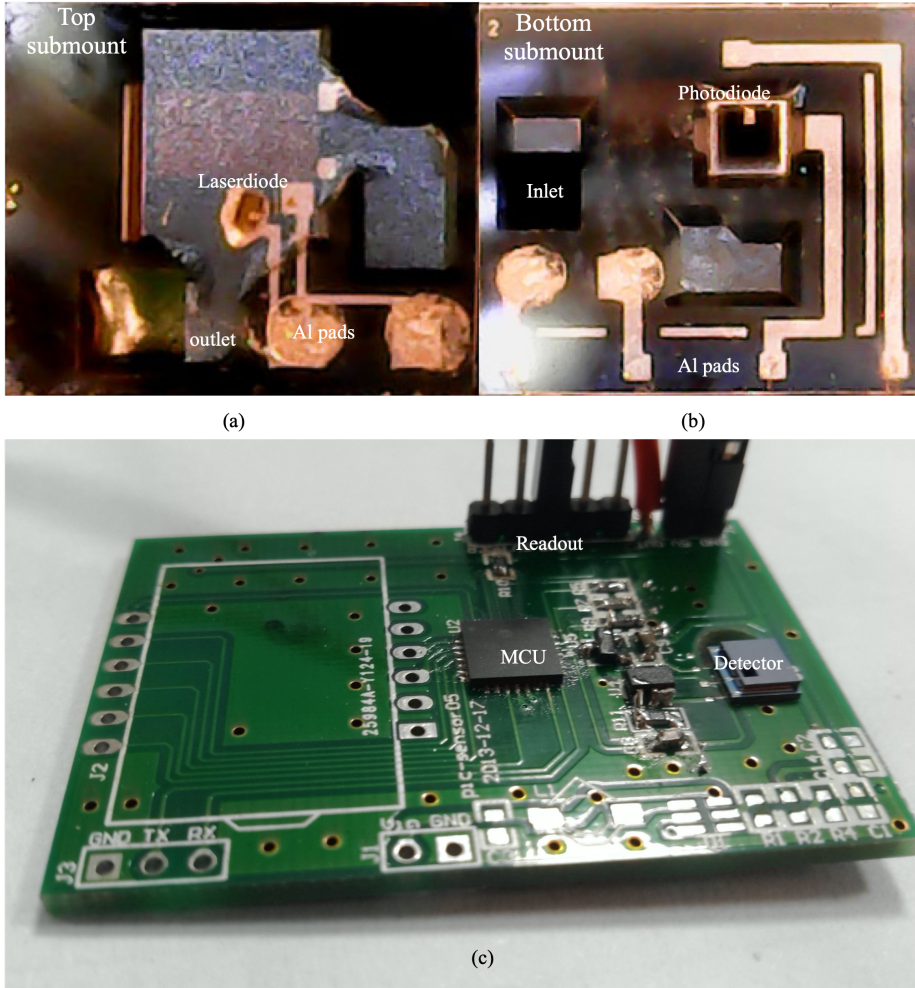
(a) Top submount and (b) bottom submount with cavities and Al contacts to form the micro chamber; (c) The bonded submounts packaged on PCB board with a control circuit design.
